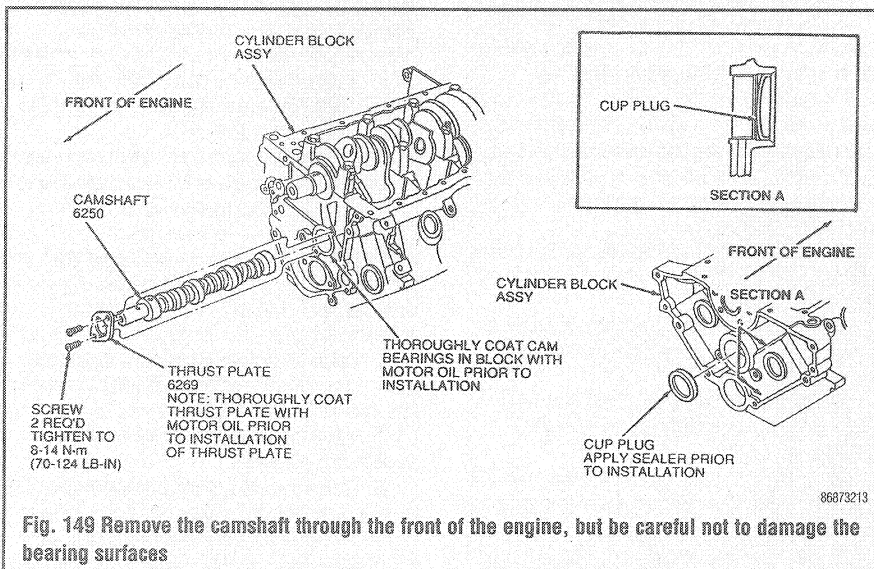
Remove the camshaft through the front of the engine, but be careful not to damage the bearing surfaces
